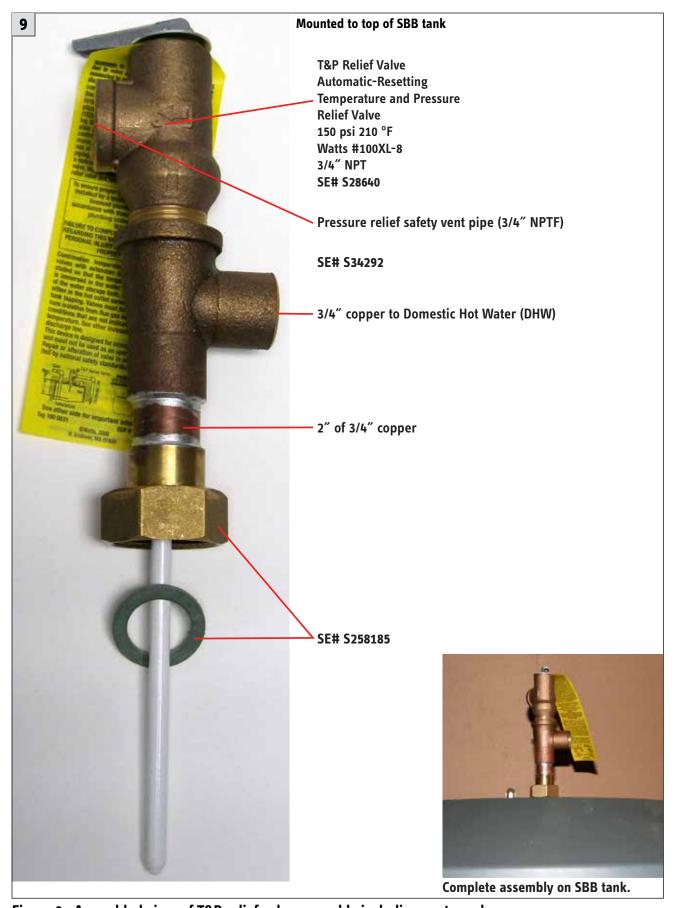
Assembled view of T&P relief valve assembly including part numbers
